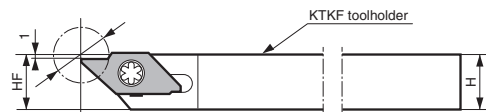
When a TKF-AS / -ASR insert is attached (The cutting edge is 1mm lower than the center line)
